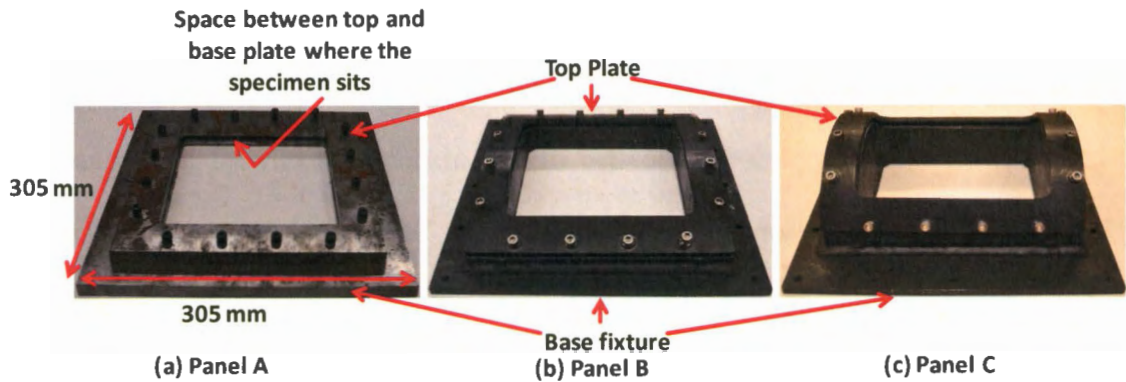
Schematics of the muzzle of the shock tube and fixture
